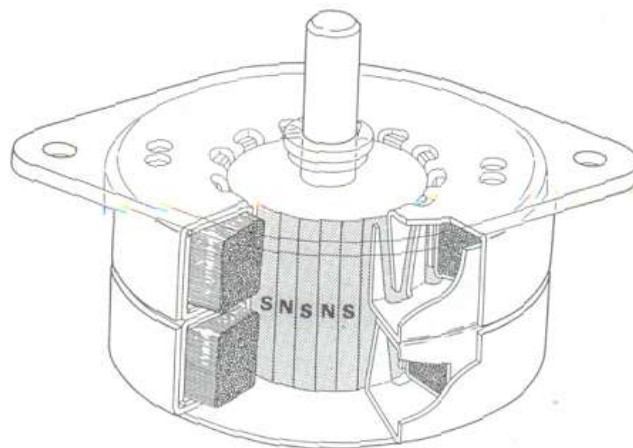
Cutaway diagram of a claw-tooth PM motor.
